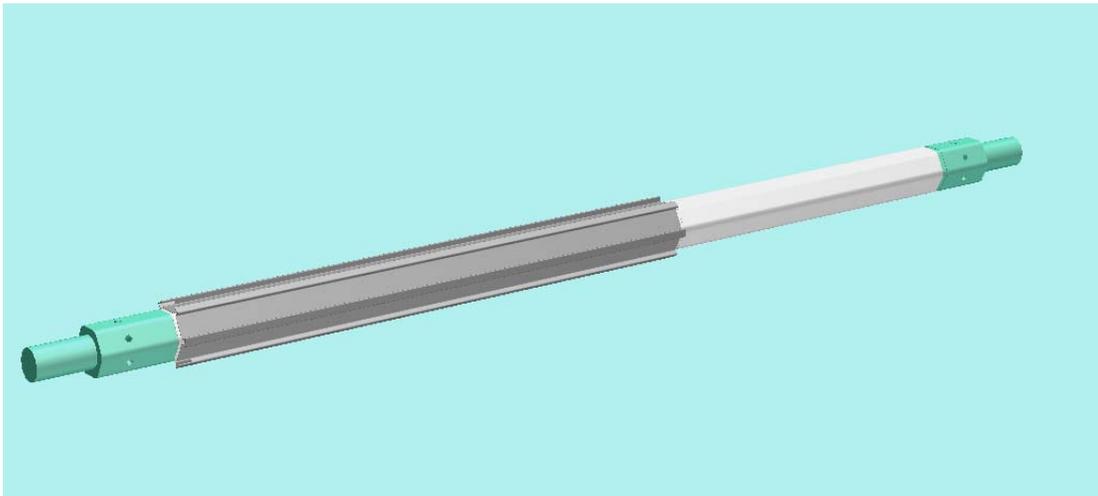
Outer shell installed over inner shell and cooling tubes (cooling tubes not shown).
